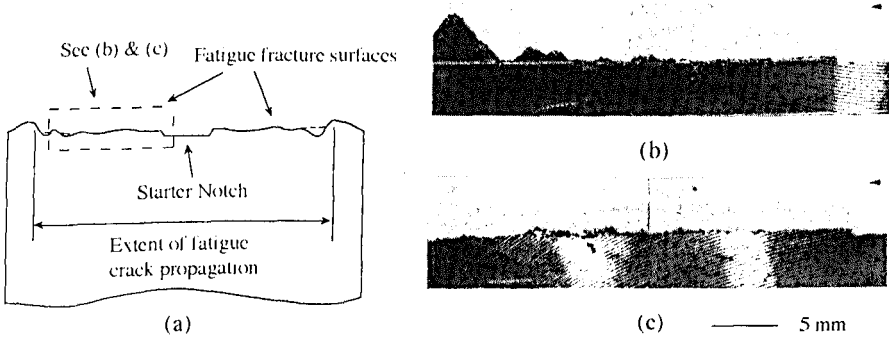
Macroscopic crack path behaviour observed in TL orientation, t/6 Plate A specimen, (a) broken specimen schematic, (b) & (c) opposing face fracture surface profiles.
